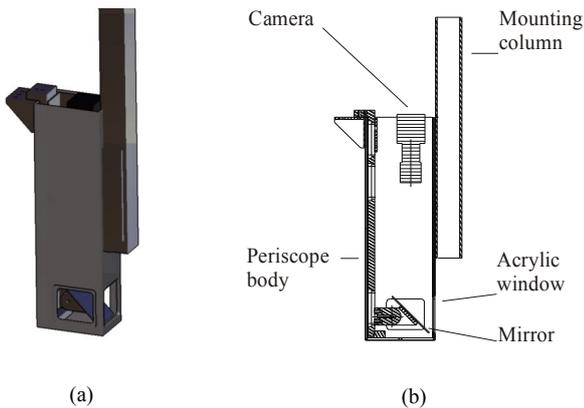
Carriage mounted periscope (a) 3D view (b) Section view
